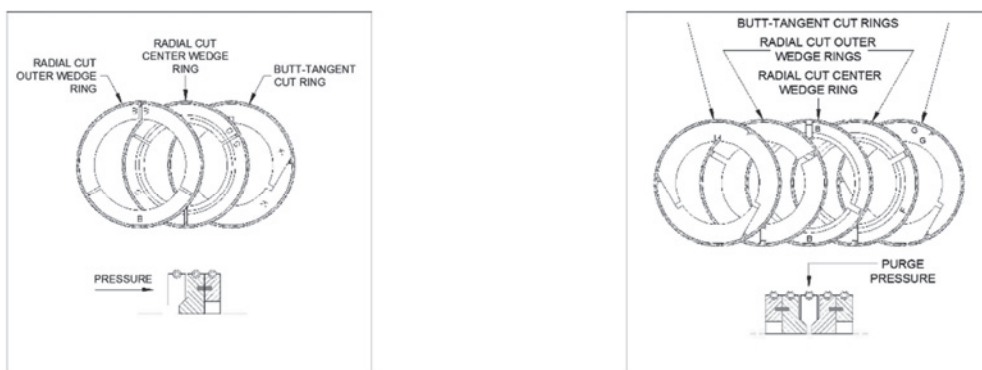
Single-Acting Side-Loaded Ring “WAT” Figure 2—Double-Acting Side-Loaded Ring “AL”
